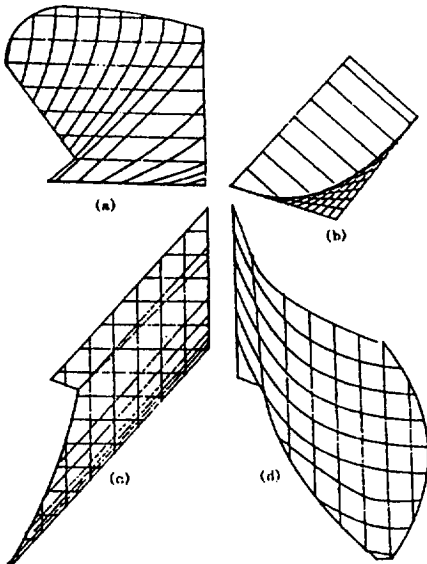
Design of cylindrical moldboard by the method of single directrices.
